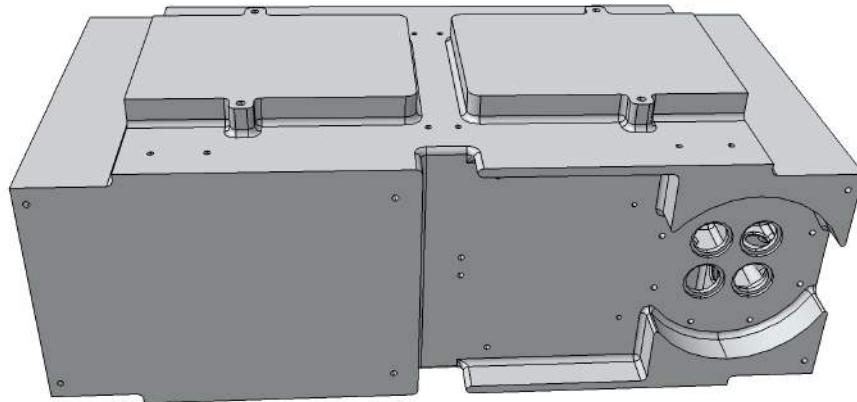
Harnessing holes that will be removed to be precisely machined later
